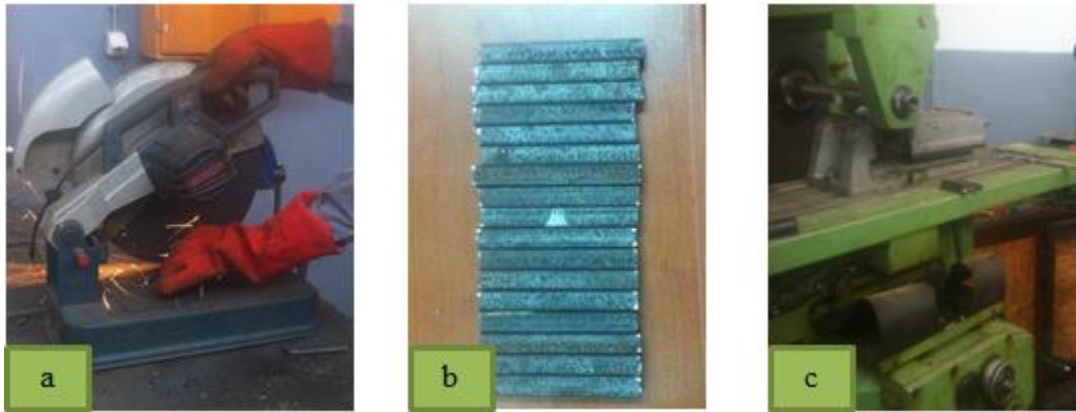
(a) Cutting Samples. (b) Samples Before Machining. (c) Machining the Sample
